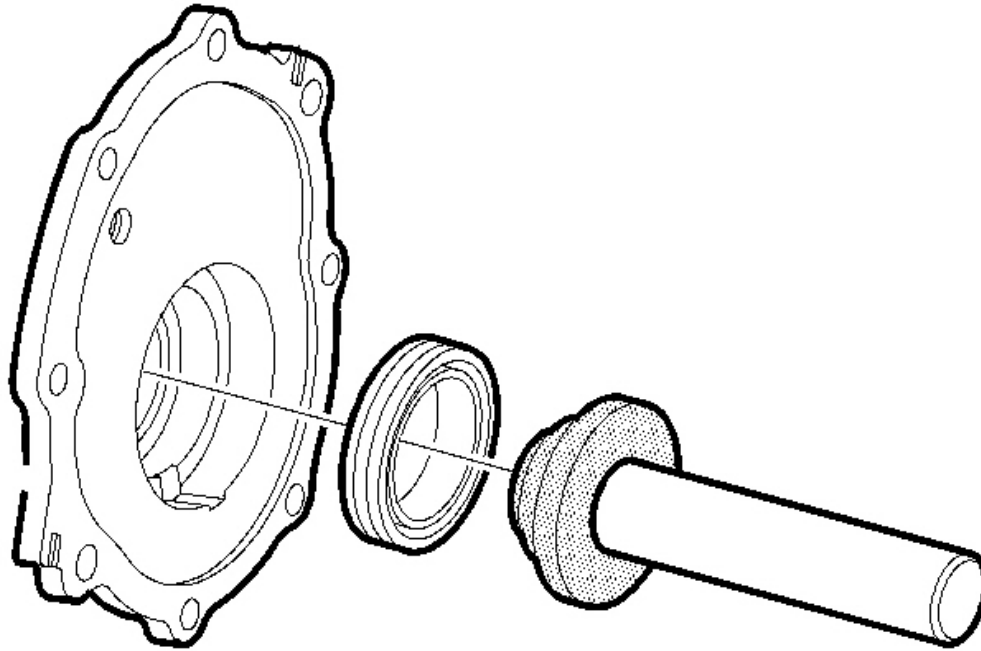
Installing Inner Oil Seal Using J44871 & Driver Handle
